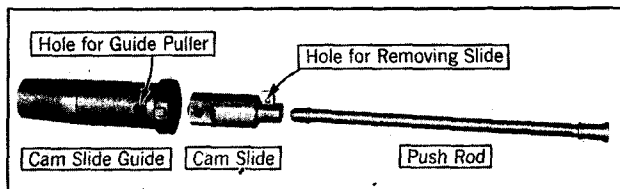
The cam slides and guides can be removed without taking off the cylinder blocks.
